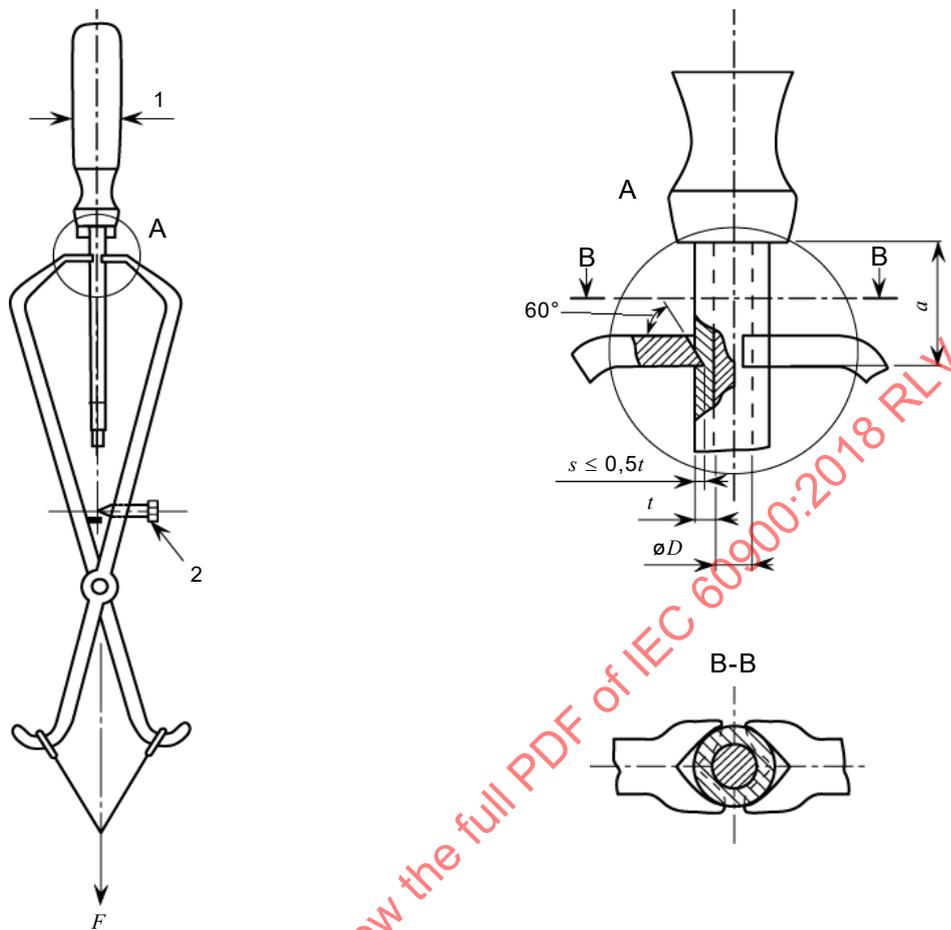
Principle of the testing device for checking adhesion of the insulating coating on conductive parts of the insulated hand tools – Test on the working head – Method B
